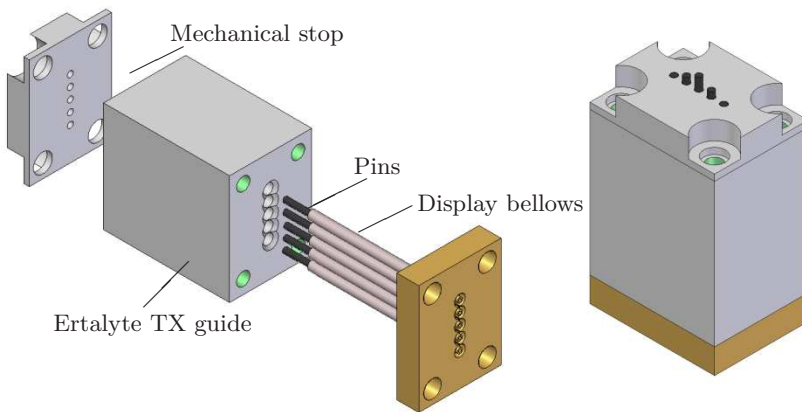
CAD model of the display; left: exploded view; right: assembly
